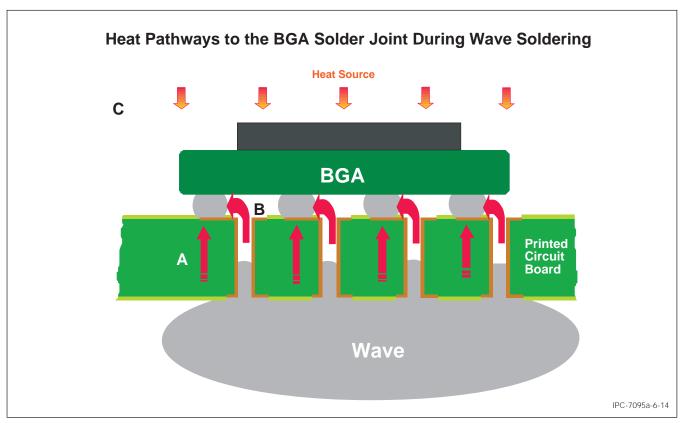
Heat Pathways to BGA Solder Joint During Wave Soldering
